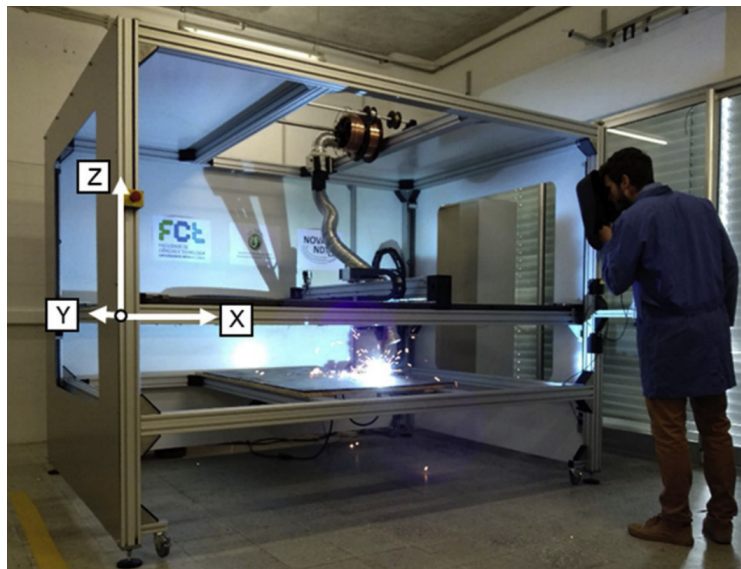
WAAM welding machine, adapted from [24].
